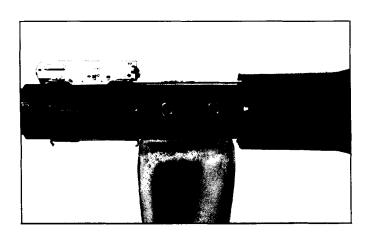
Mounting Column In Vise By Welded Tapping Nuts
